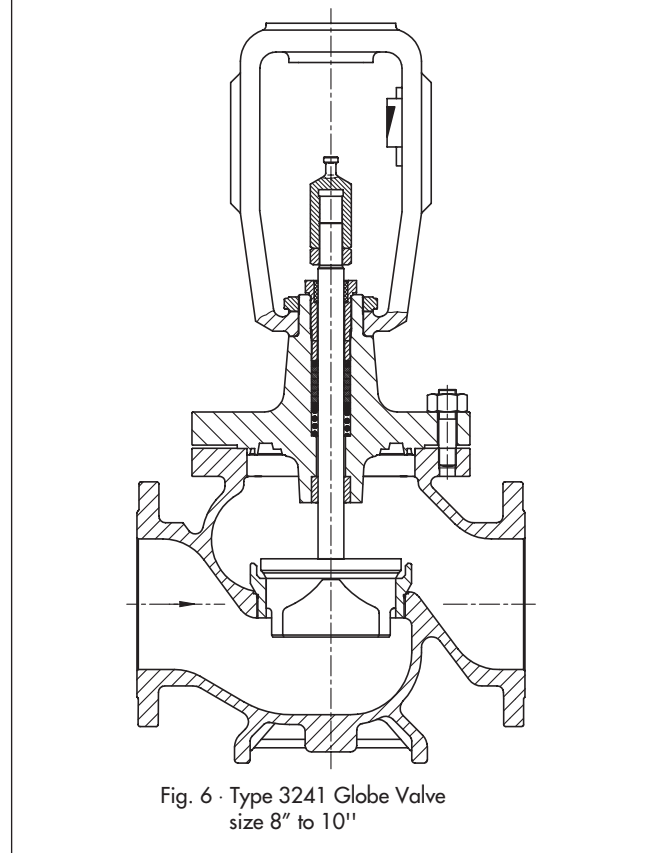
· Type 3241 Globe Valve size 8" to 10"
